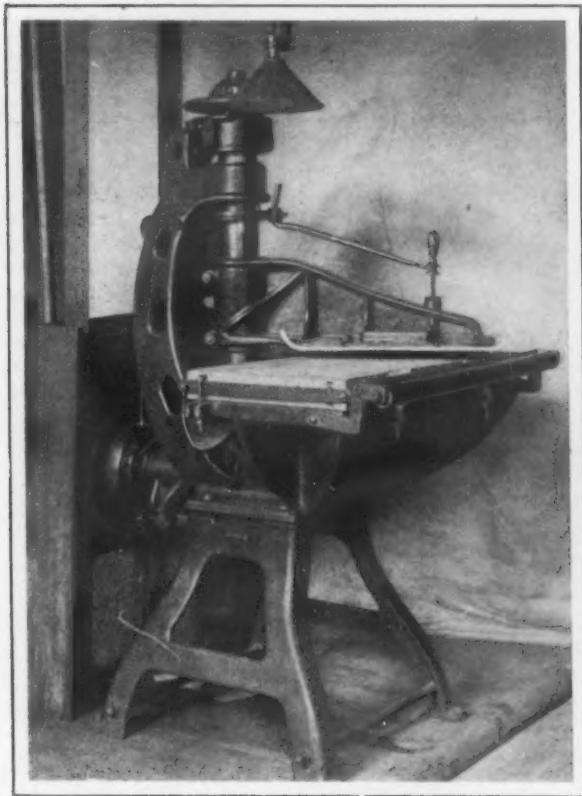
Safety Guard on Clicking Machine to Prevent Fingers Getting Under the Platen When Lever is Released
